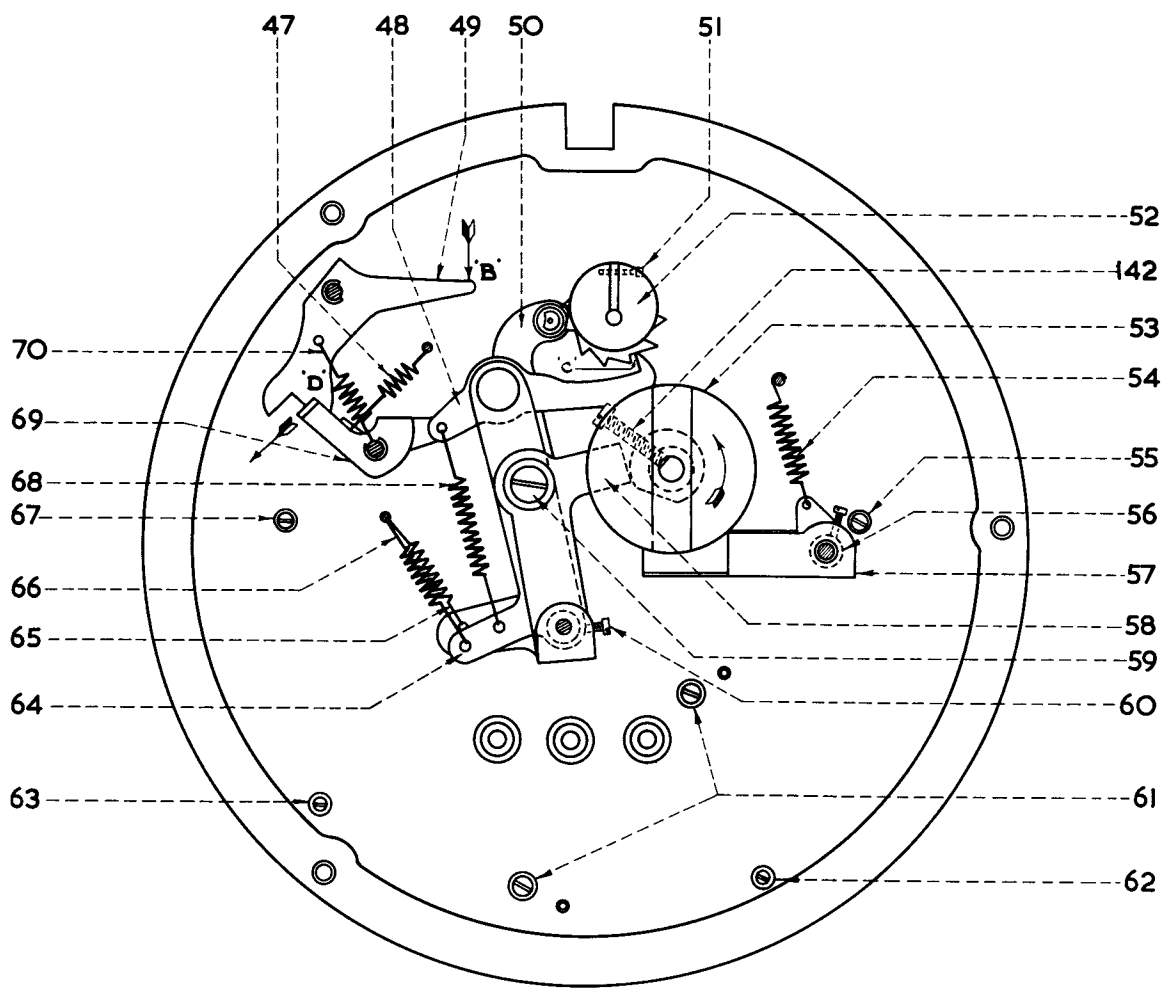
TRANSMITTER HEAD, REAR VIEW
